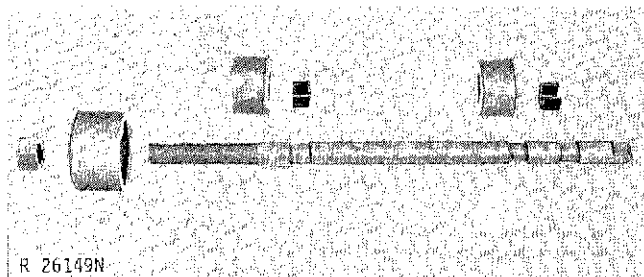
JDE-6 Camshaft Bushing Replacement Set
